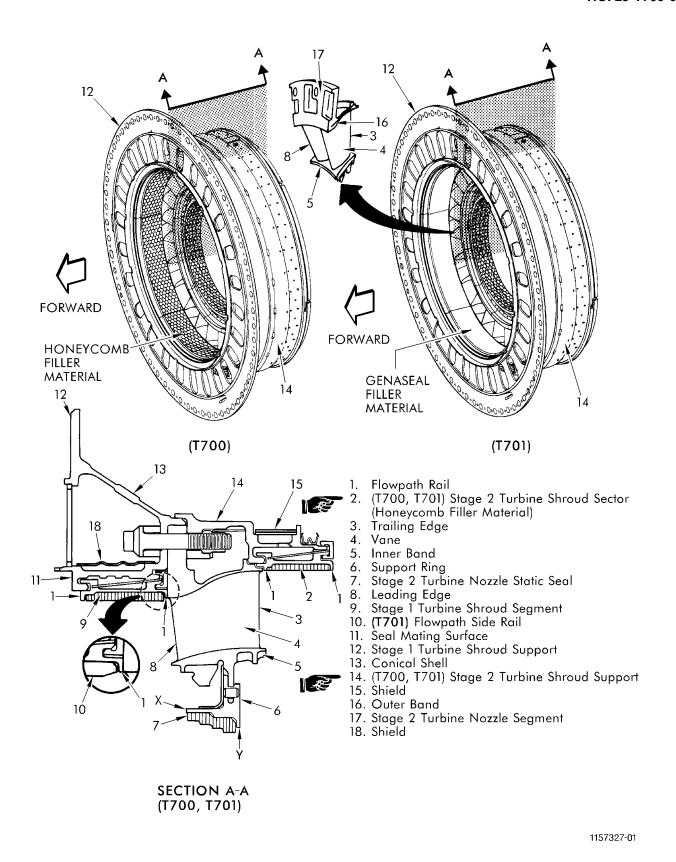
Gas Generator Stator; Inspection (Sheet 1 of 2)
